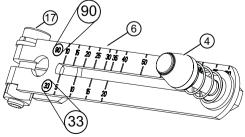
Long lever 6DR4004-8L with mounted carrier pin 4 and cylinder head screw 1
